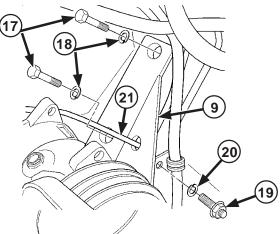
Compressor Mounting Bracket to Cylinder Head
